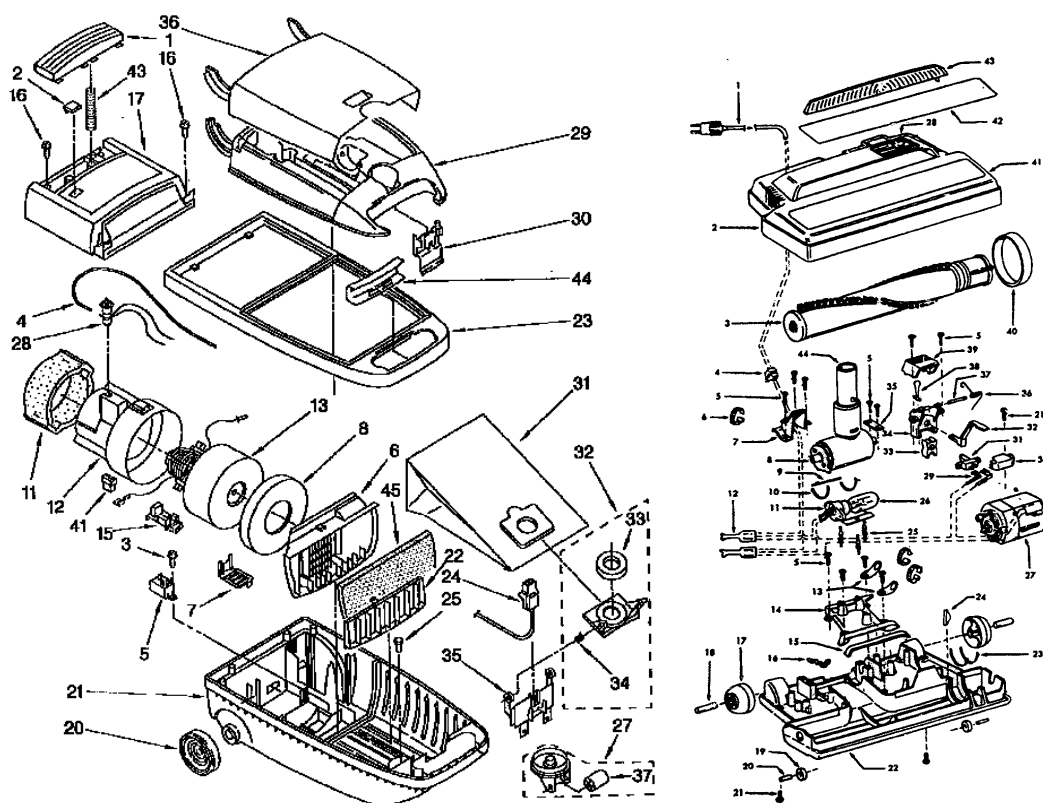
Example of an exploded drawing and spare parts listing for the canister and the nozzle plate ⁽⁴⁸⁾
